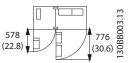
Space in front of IP21/IP54 enclosure type, frame size F9
